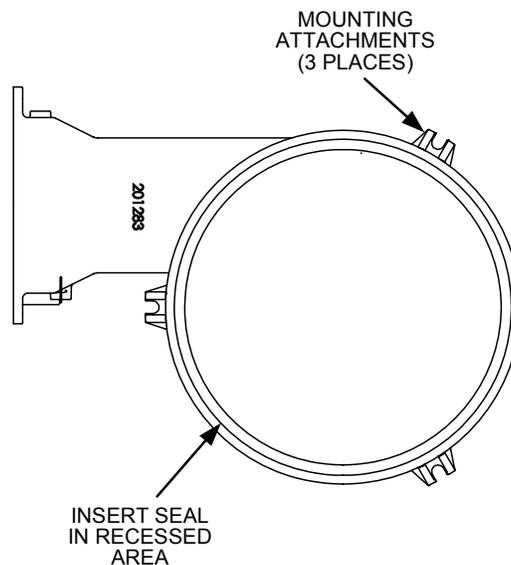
Benchmark 2.0LN Exhaust Manifold - Top View
